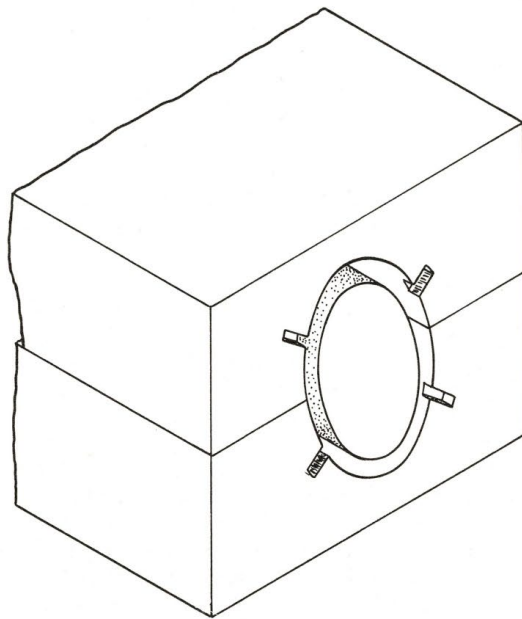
End-face of a mould provided with rectangular "spikes".
